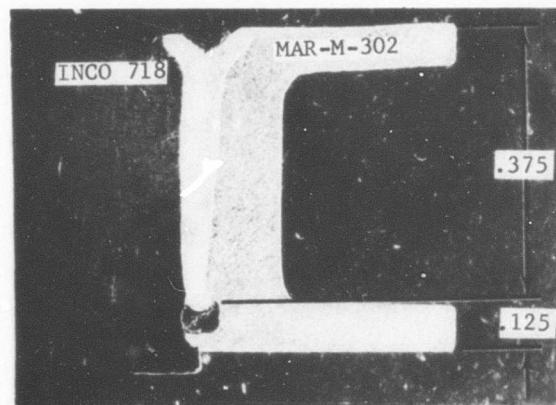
Turbine Rotor EB Weld Joint Revised Design for Controlled Penetration.
